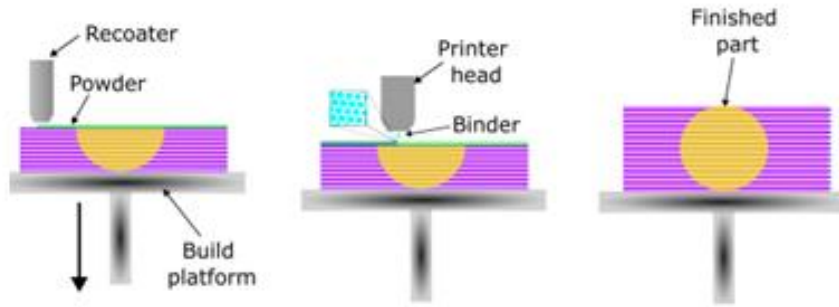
Scheme of the process of 3D printing of molding sands using the binder jetting method. [8]
